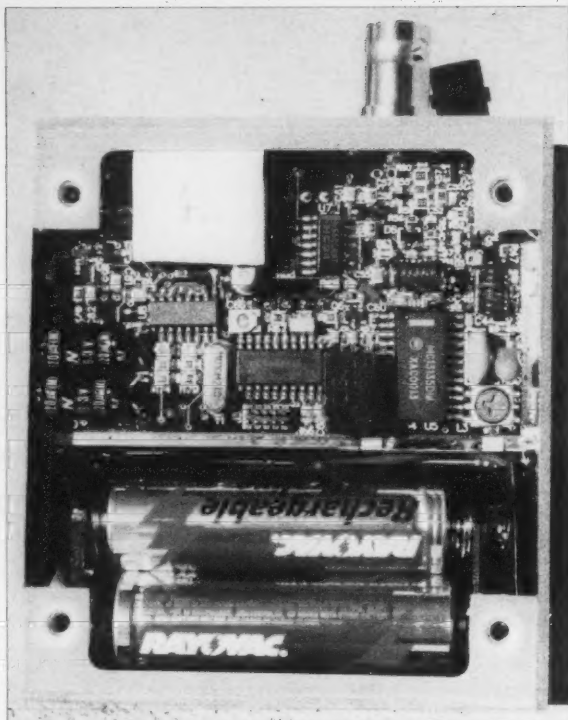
Photo D. Inside, Sniffer 4 is a rugged assembly of surface-mount parts. I'm glad I didn't have to build it! (Photo by Joe Moell KØOV)
